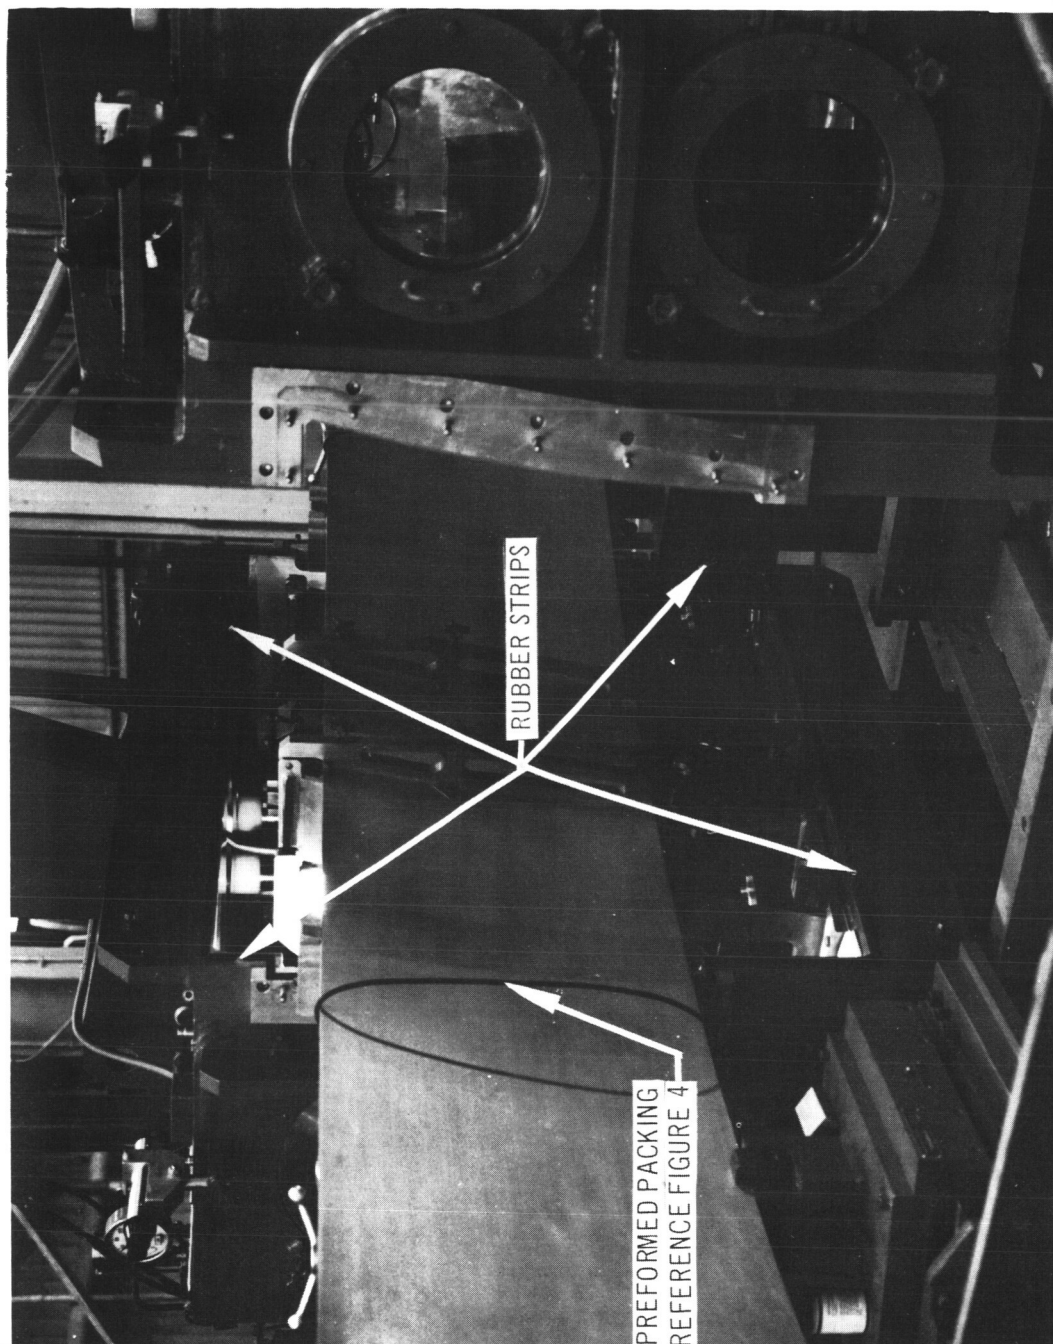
NEOPRENE RUBBER STRIPS BETWEEN THE MACHINED MATING SURFACES.
